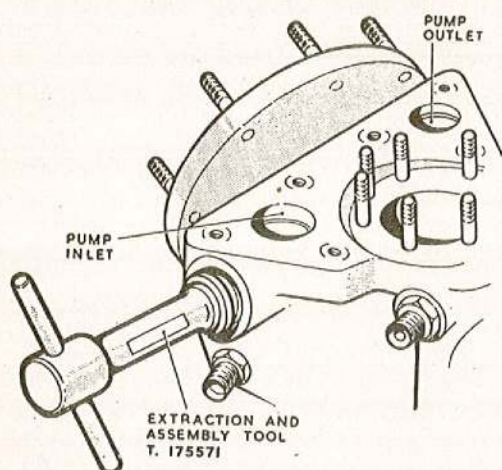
Withdrawing end plugs from inlet and outlet passages
